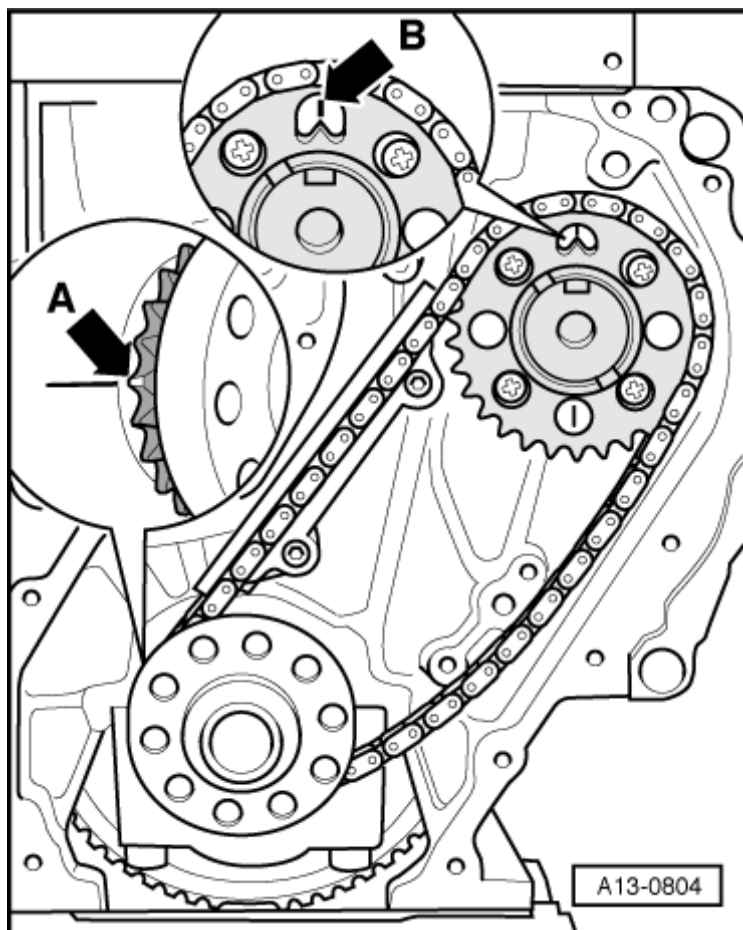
Identifying Large Sprocket Installed Into Timing Chain With Tab Aligned To Mark On Cylinder Block
